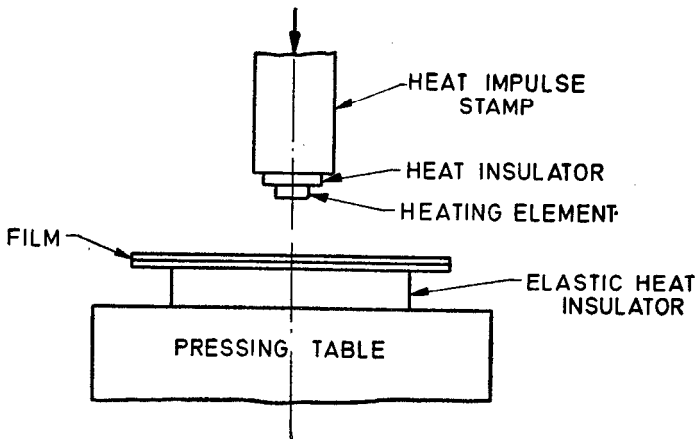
IMPULSE WELDING WITH SINGLE SIDED HEAT IMPULSE STAMP
